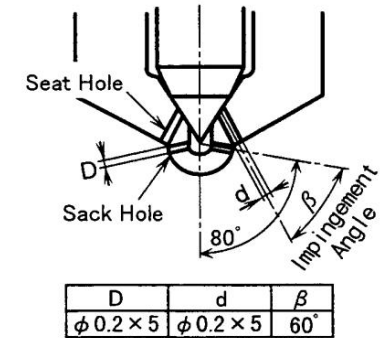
Configuration of Impinged-Spray Nozzle with Engine Tests
